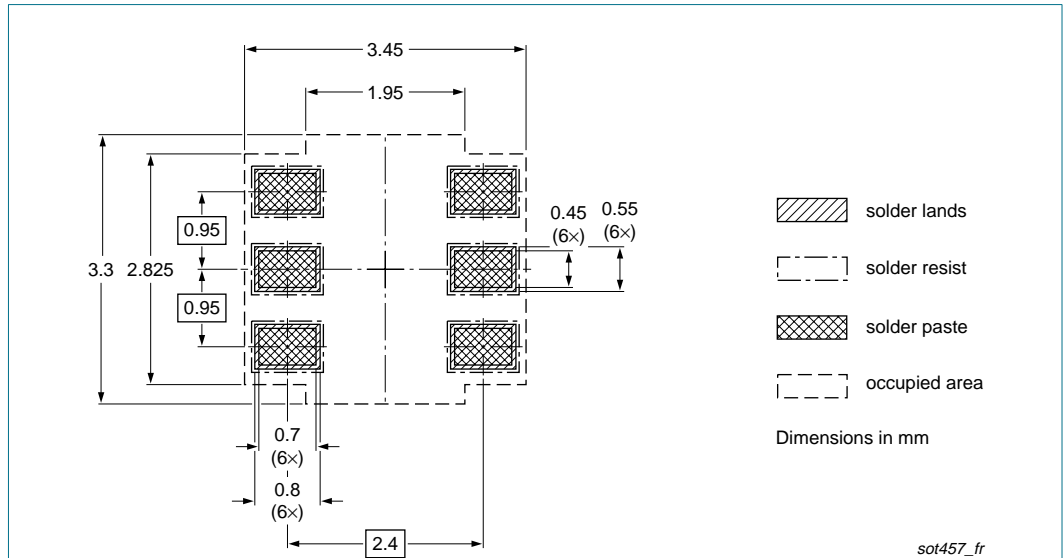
Reflow soldering footprint SOT457 (SC-74)
